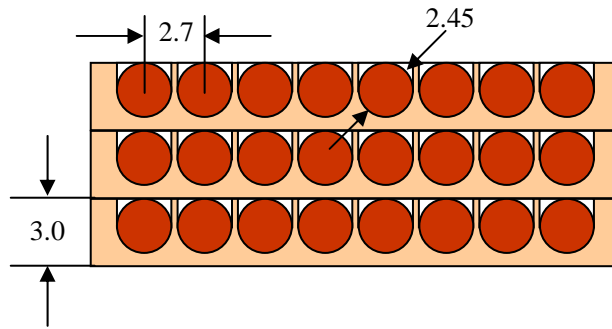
Geometrical pattern of coil cross section showing conductors supported in machined U-grooves. Only 3 out of 6 layers shown
